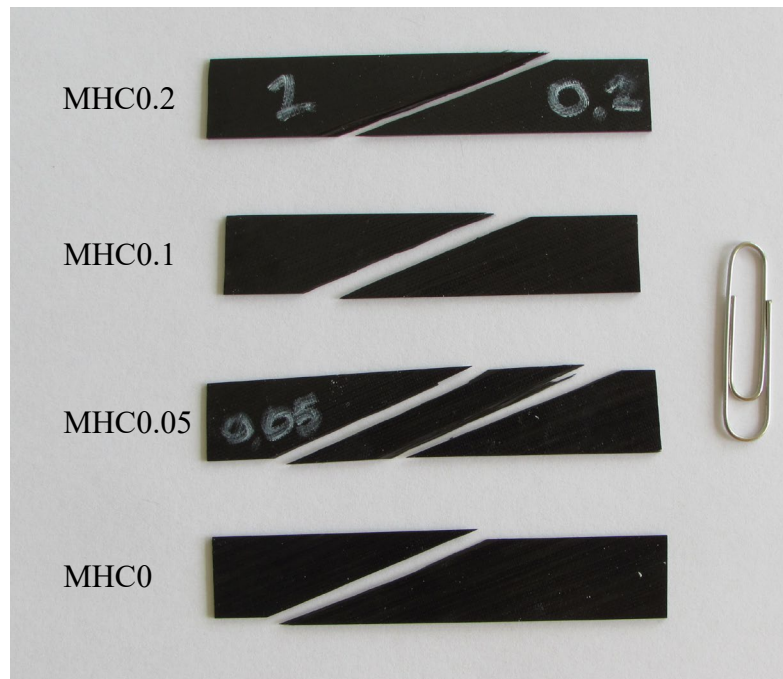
Straight edgewise fracture surfaces of failed specimens.
